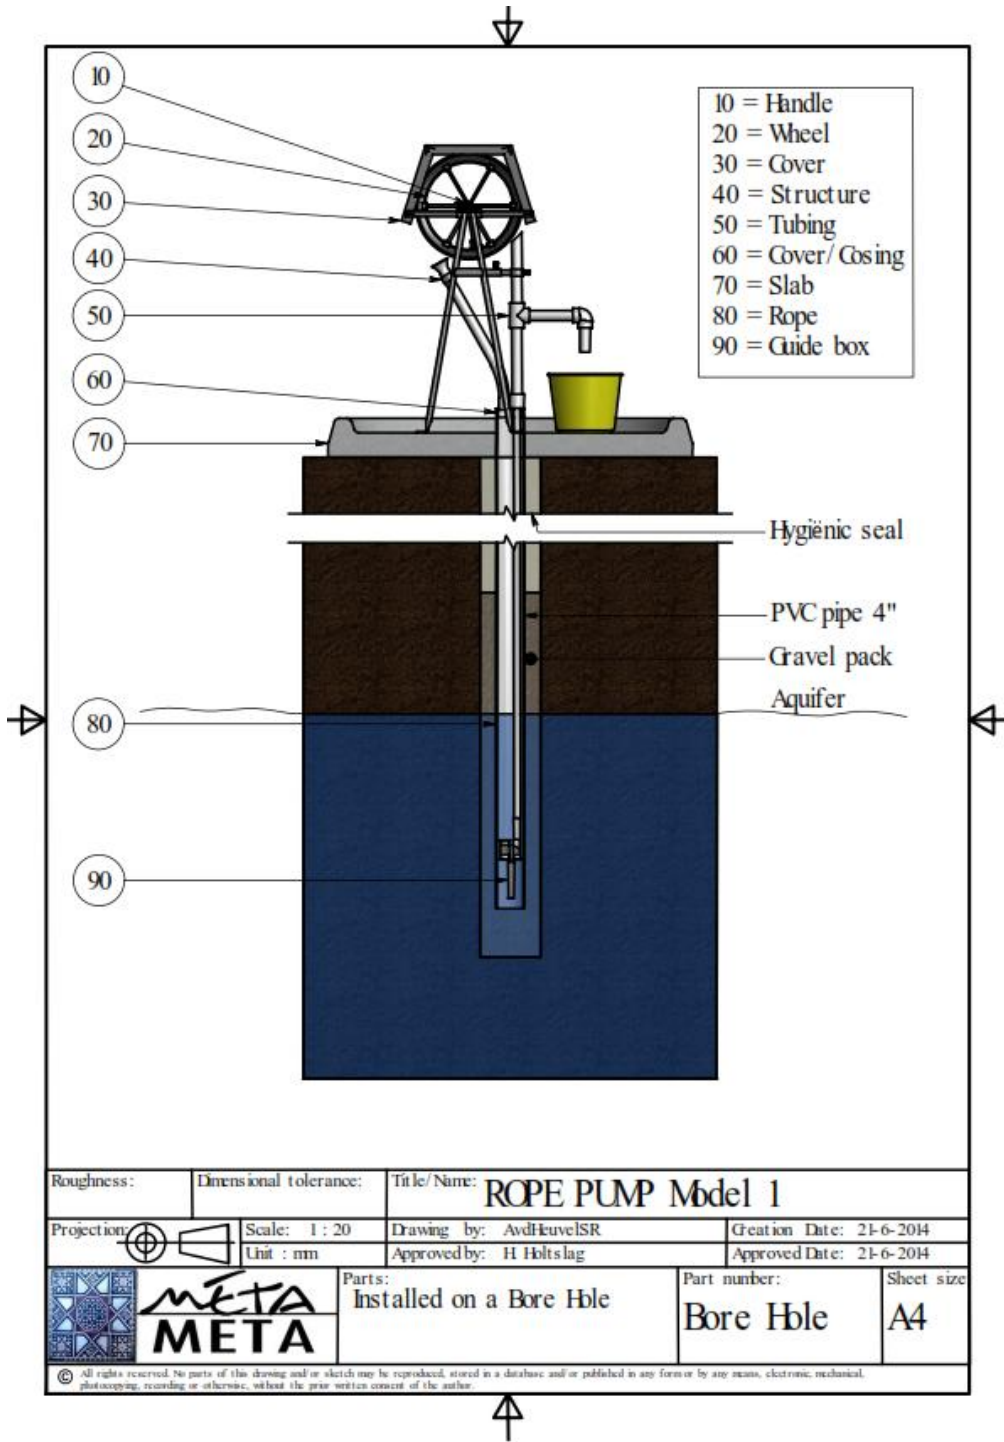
Rope and washer pump technical drawing (MetaMeta, 2014)
